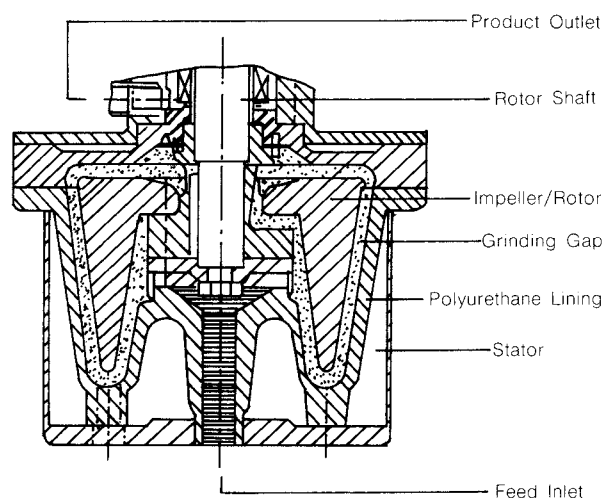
Cross-sectional view of the grinding chamber of CoBall mill
